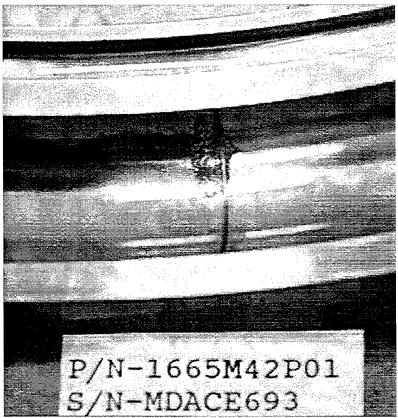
Photos of TDC Coated Bearing Race Damage Evident after Induced Defect Test.
